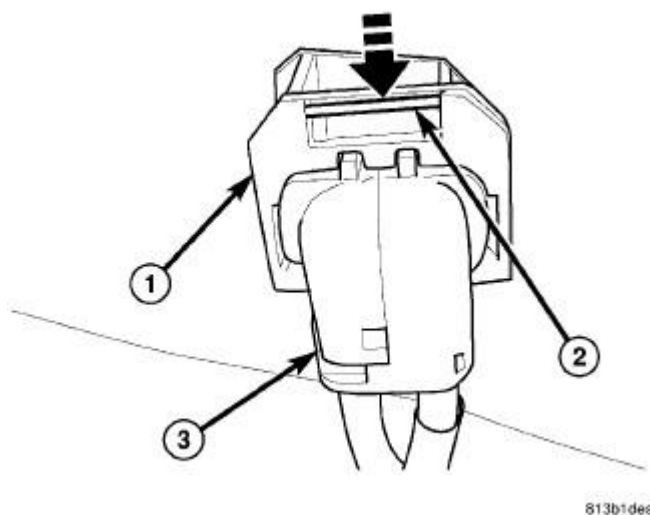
RELEASE WHEEL SPEED SENSOR CONNECTOR
